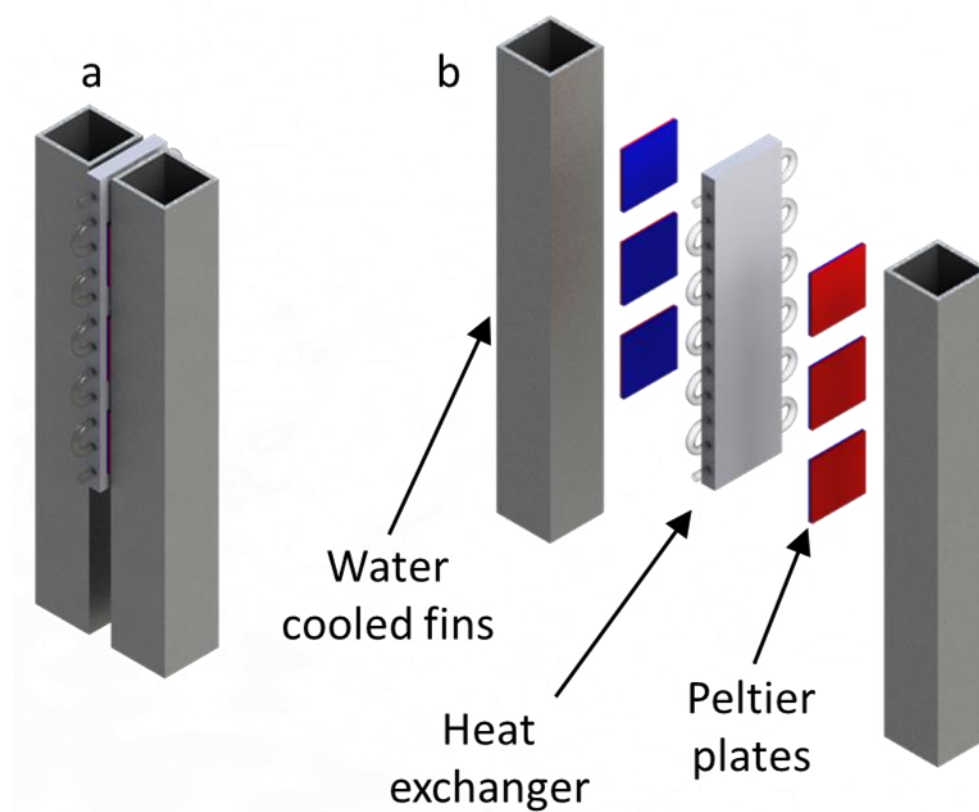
Schematic of the temperature controller showing (a) the assembled components and (b) an exploded view of the components. The hot side of the Peltier plates are shown in red while the cold sides are shown in blue. Cool water was pumped through the hollow fins.
